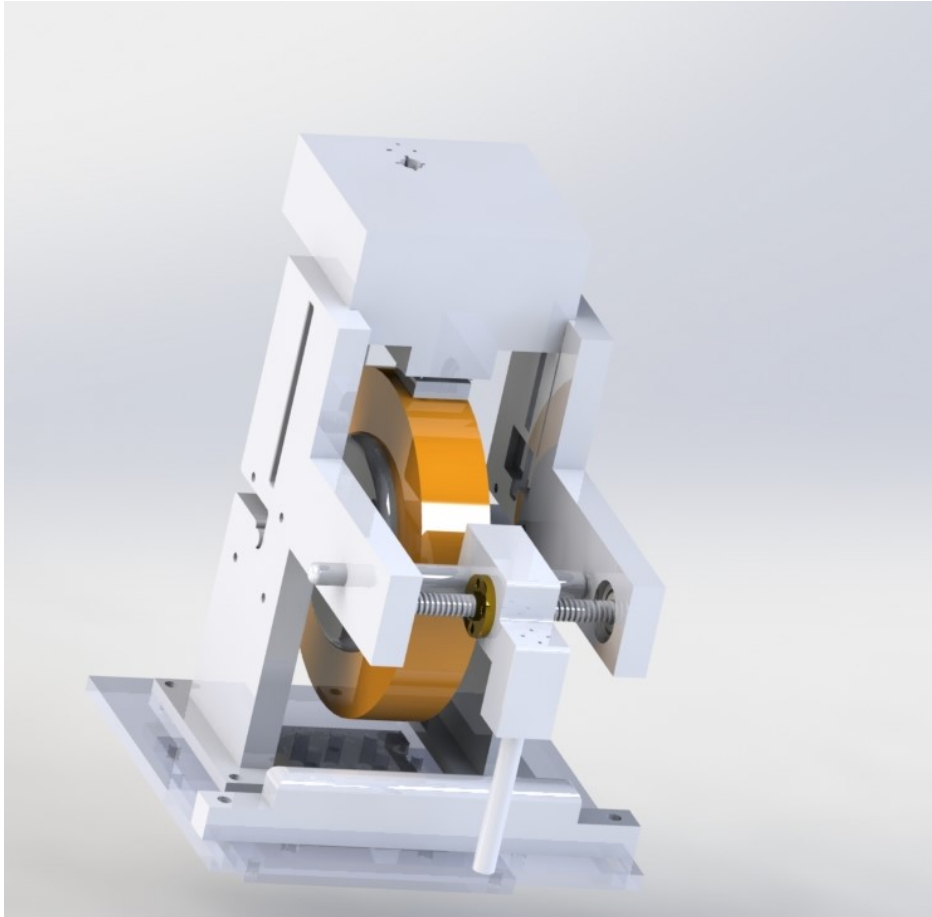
Perspective view of web holder and parts of adhesive dispenser.
